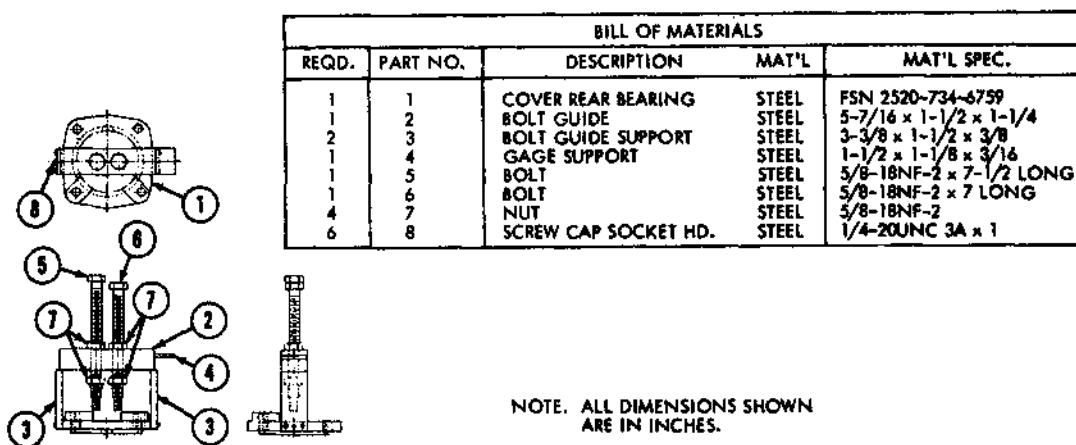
Fabricating adjusting fixture for rear output shaft bearings
